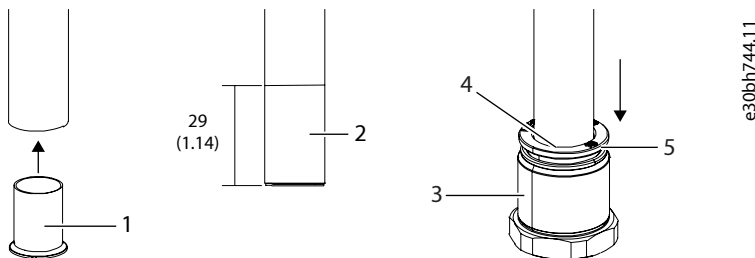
Inserting a Pipe into the Cooling Circuit Connector, mm (in)
